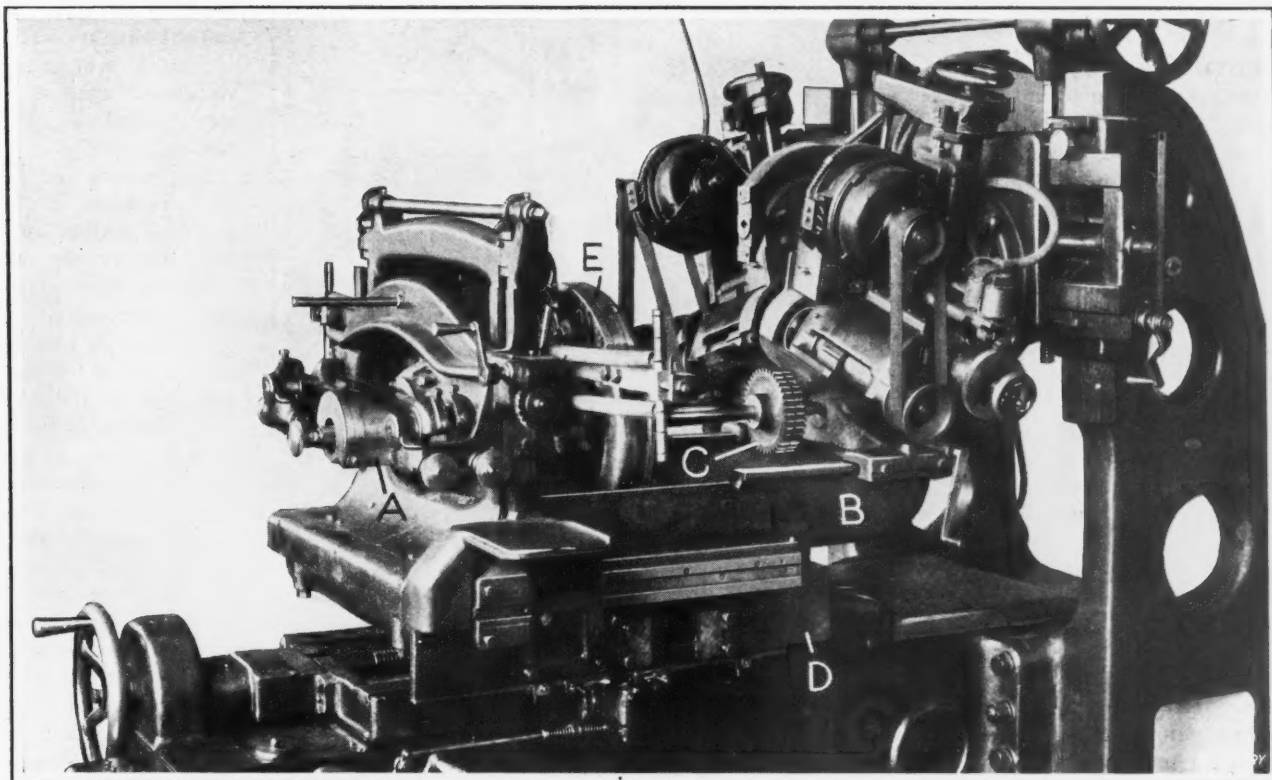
Two-wheel Type of Gear Tooth Grinder used for grinding the Teeth of Maag Gears
